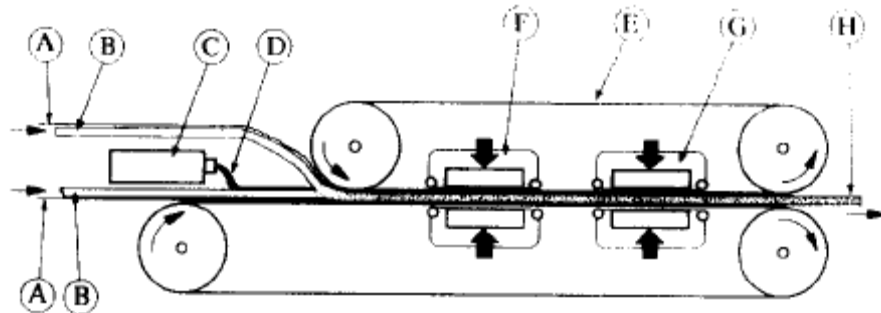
Manufacture of GMT by melt impregnation: (A) Thermoplastic resin films (B) Glass fiber mat (C) Extruder (D) Thermoplastic resin extrudate (E) Double belt laminator (F) Heating zone (G) Cooling zone (H) Finished sheet product [84].
